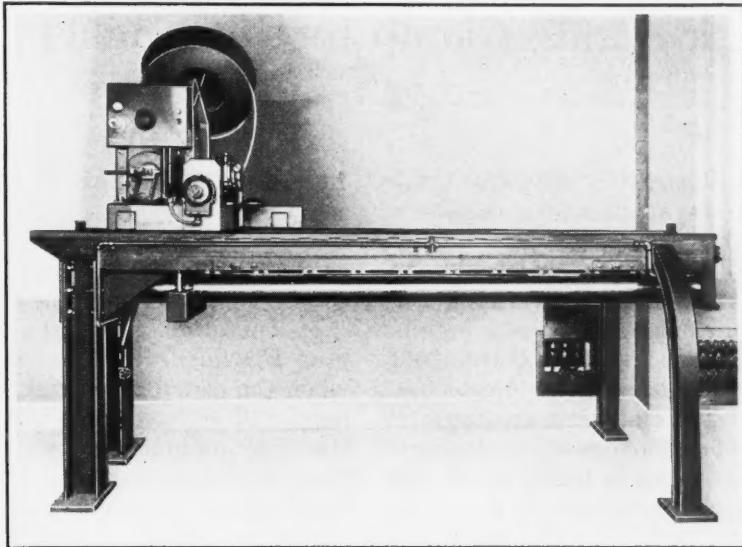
Westinghouse Eight-foot Seam Welder, Suitable for Welding All Types of Tanks and Pipe
